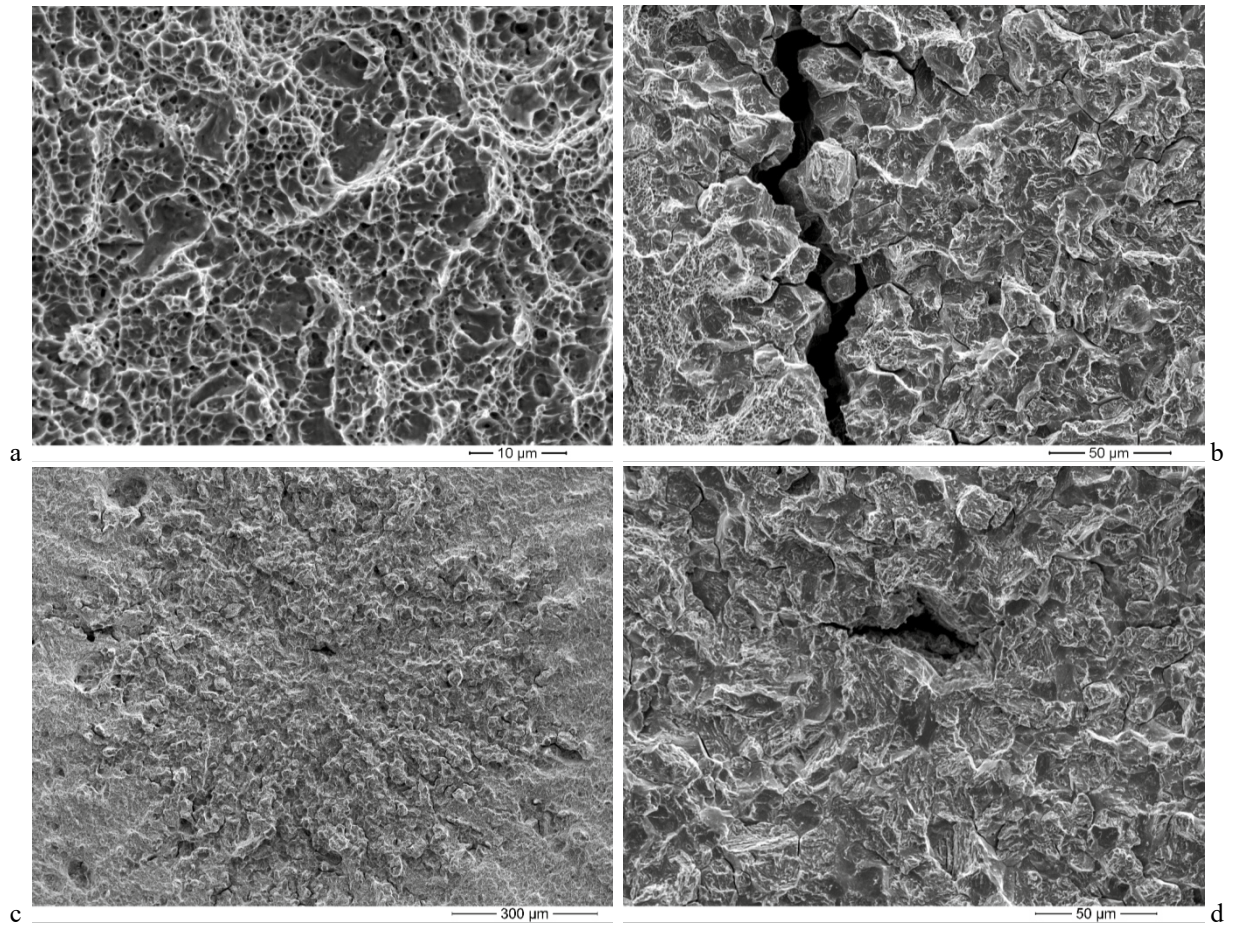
Fracture surface of a tensile specimen tempered at 160 °C. Electron microscopy. Central (normal) part. Prevalent ductile fracture mechanism (a); secondary crack (b); brittle fracture island (c, d).
